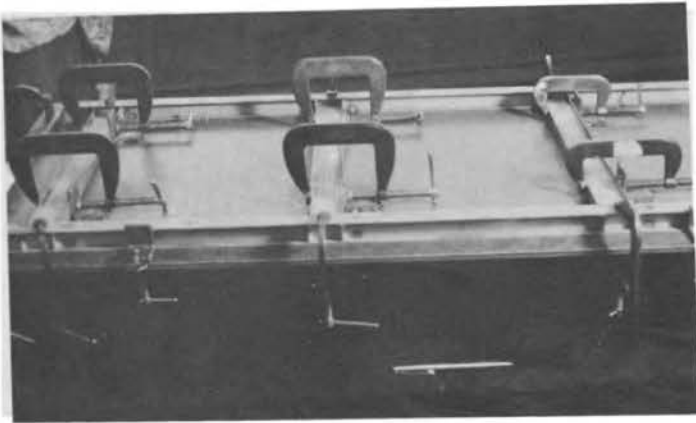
COLUMNS AND BEAMS CLAMPED
